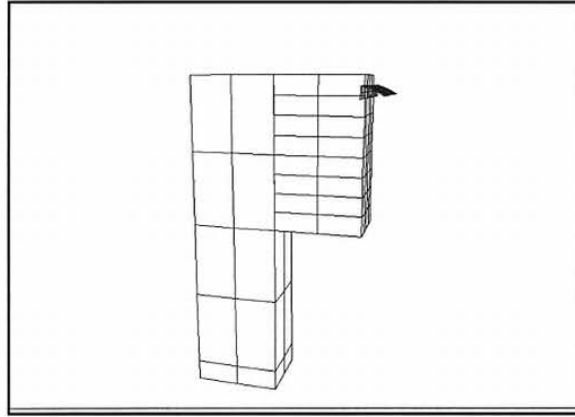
Redesigned Back-up Plate: Steel Angle Bracket
